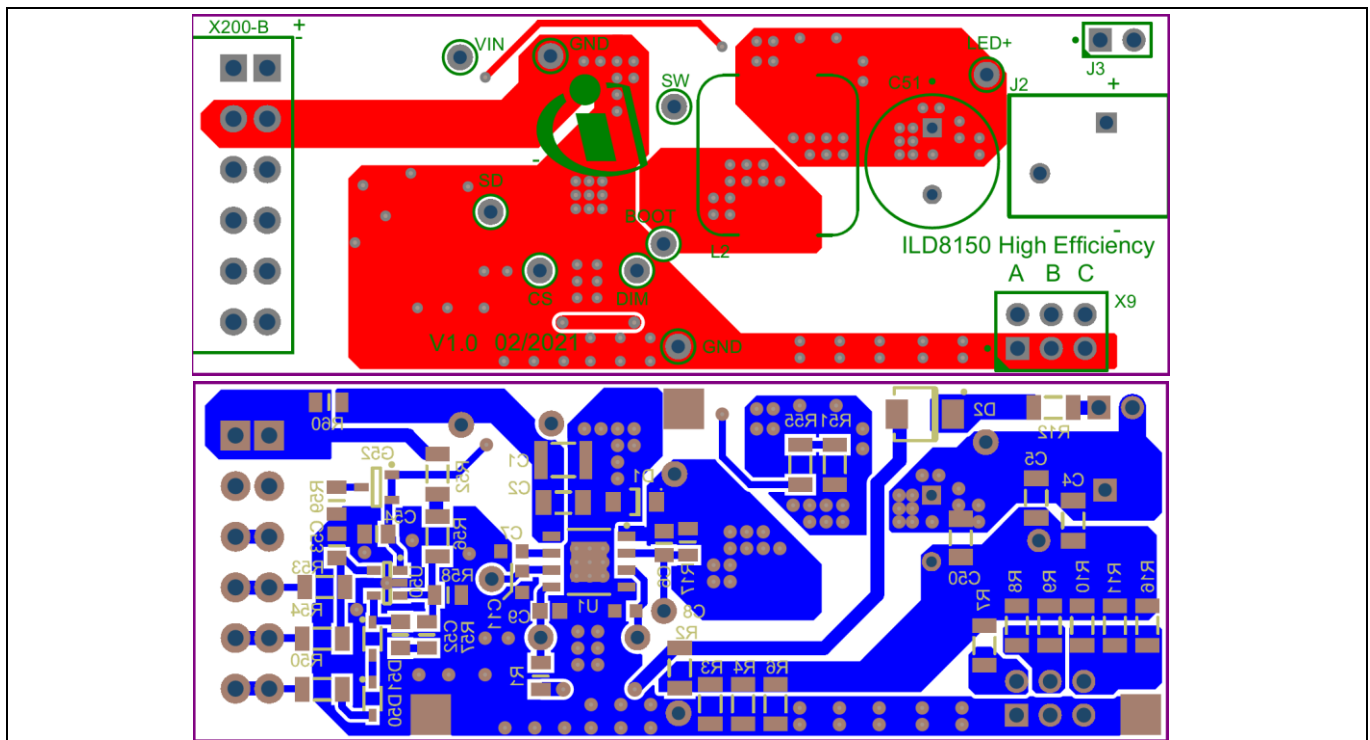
ILD8150E high-efficiency design PCB layout – top and bottom
